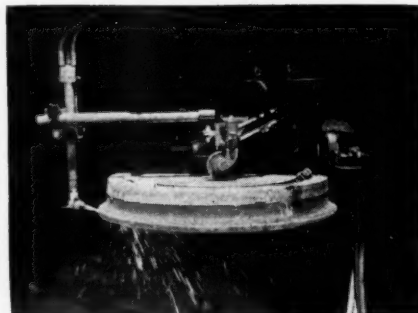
A bevel-cutting adapter is necessary for cutting bottom bevel of flange (No. 3).
